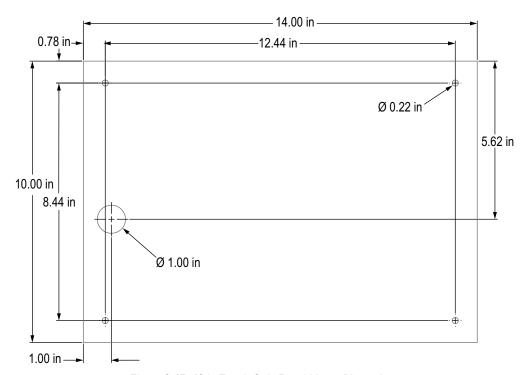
12 in Touch-Only Panel Mount Dimensions
